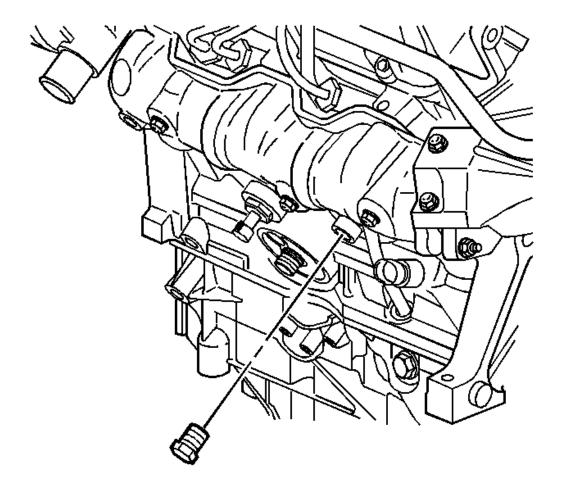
Installing Left Coolant Drain Plug Courtesy of GENERAL MOTORS CORP.
